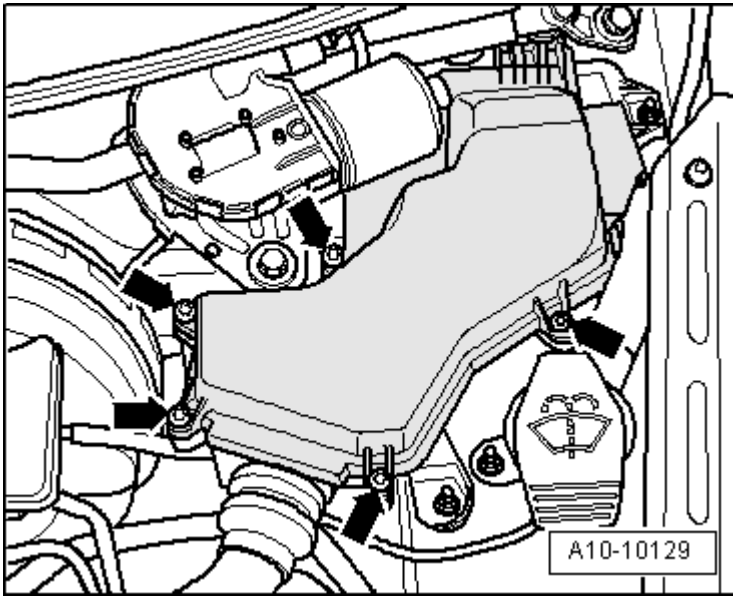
Removing Bolts And Cover Form E-Box At Left In Engine Compartment
